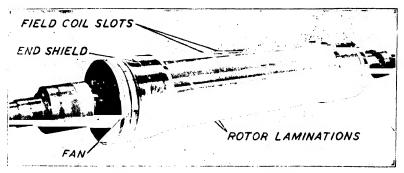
Rotor of a High-Speed Turbo-Alternator Courtesy of Westinghouse Electric and Manufacturing Company
